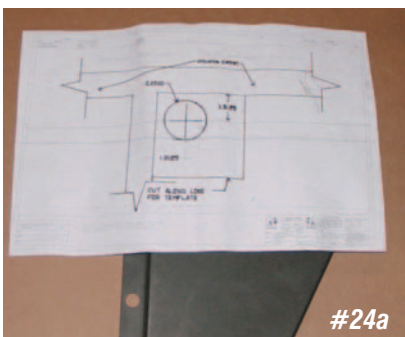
& 24b & 24c: A 2” hole must be drilled in the driver's side filler panel for the upper radiator hose on the cross-flow. A template is supplied with the cross-flow radiator so there is no guessing on where to put the hole.
